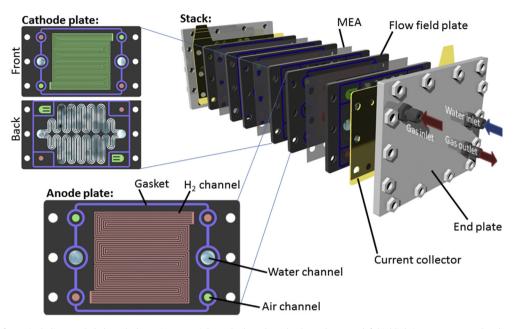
Stack assembly of PEFC including 'exploded' stack shown in upper right, cathode and anode plates shown on left highlighting gas, water and sealing channels. Bipolar plate design shown is based on that of Pragma Industries, France.
